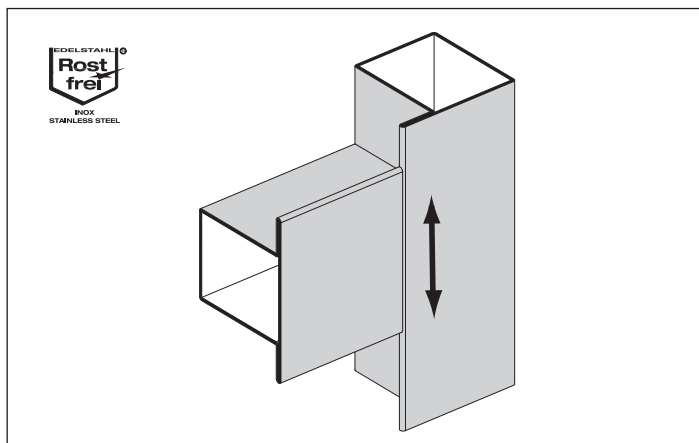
Weld the T-joint from the centre to the outside
